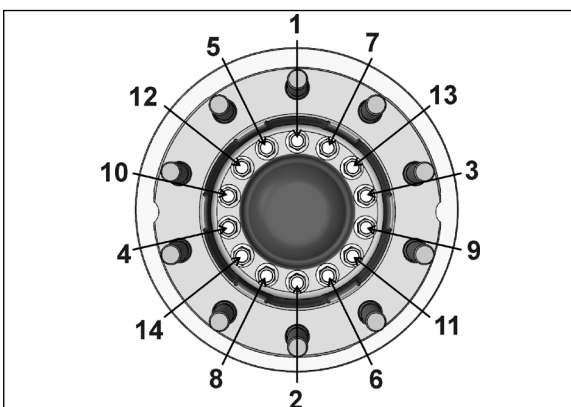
HUB FLANGE HEX CAP SCREW TIGHTENING SEQUENCE
